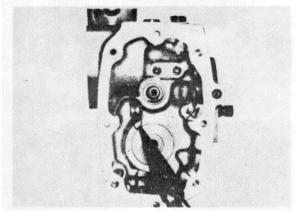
G-63. Installing Snap Ring in Throttle Shaft
